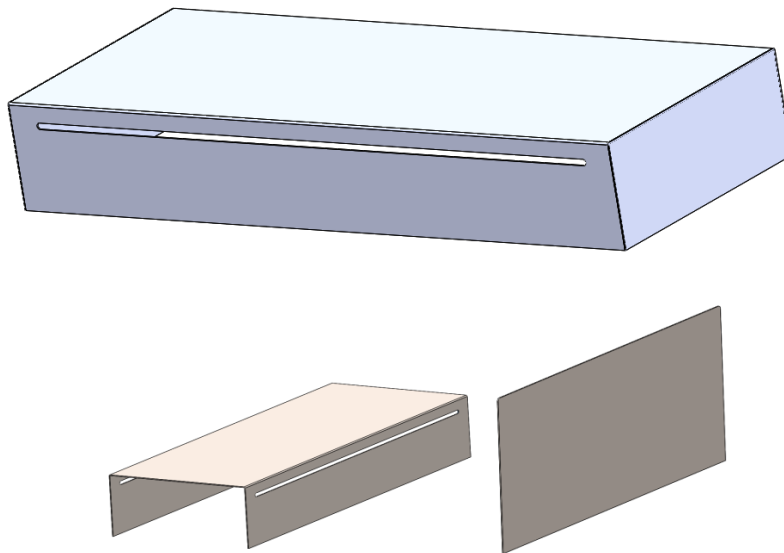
welded assembly and the parts it is composed of.
